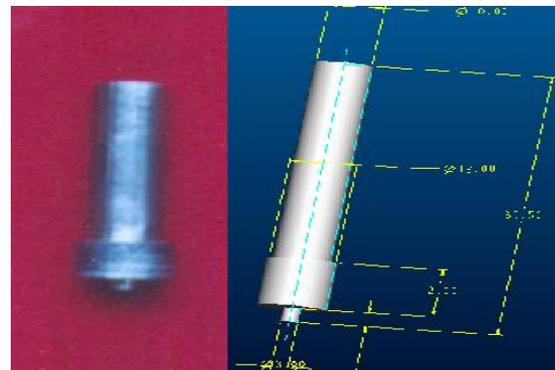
A photograph view of the Friction stir welding test tool for Experimental and Numerical analysis
